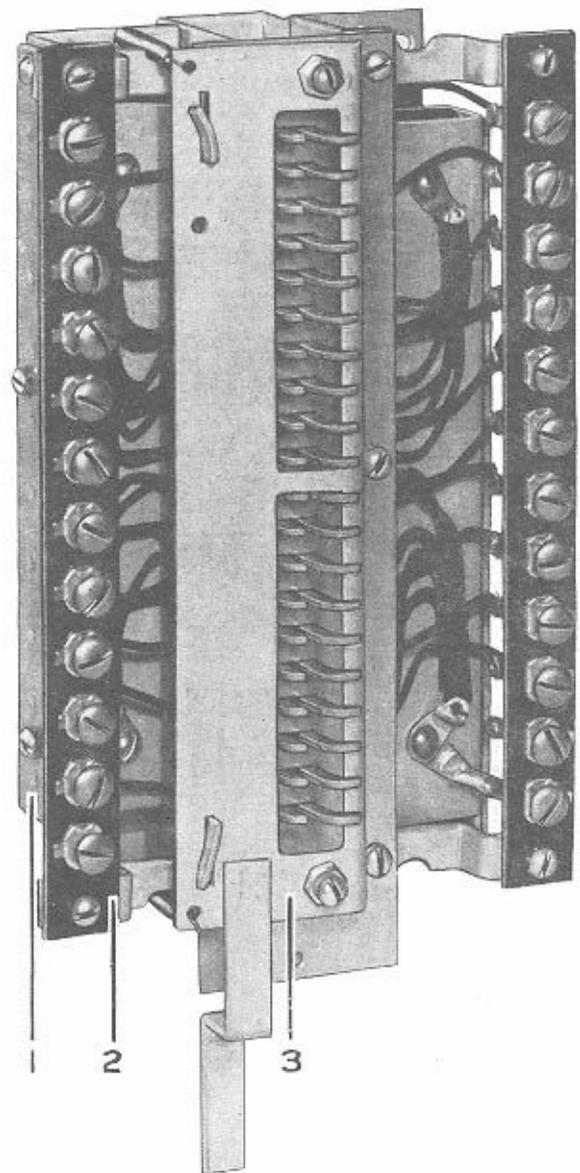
No. 11822 Coil Bank Assembly (Front View)
